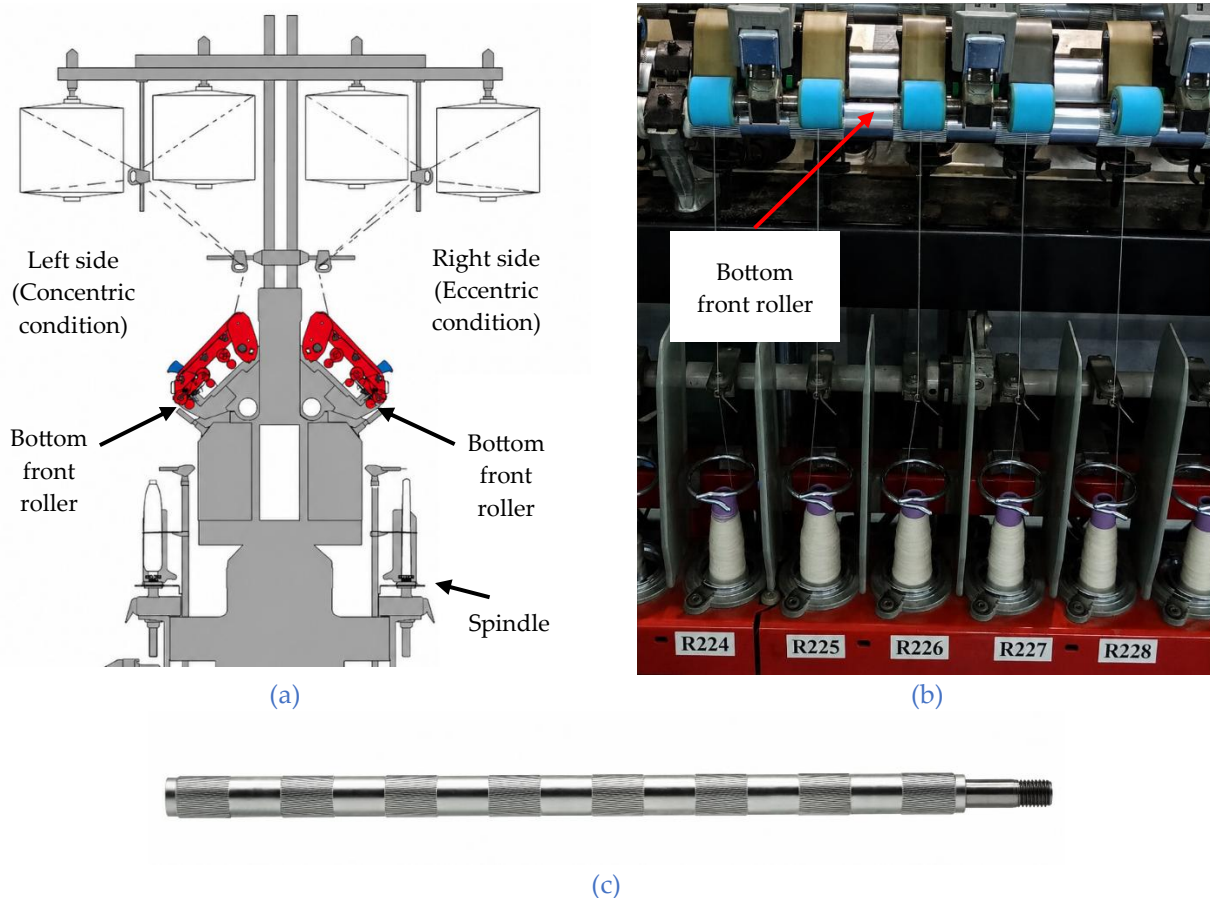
Experimental setup consisting of (a) schematic paired bottom front roller positions [32], (b) experimental spindle section, and (c) bottom front roller component similar to that used in the experiment [33].
